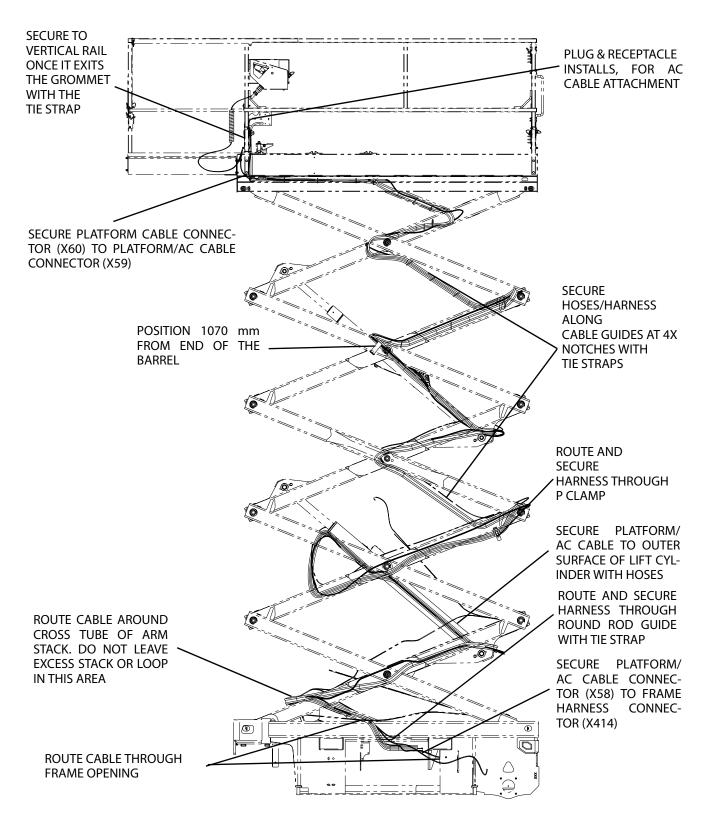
Scissor Arm Assembly - Cable Routing (Coiled)
